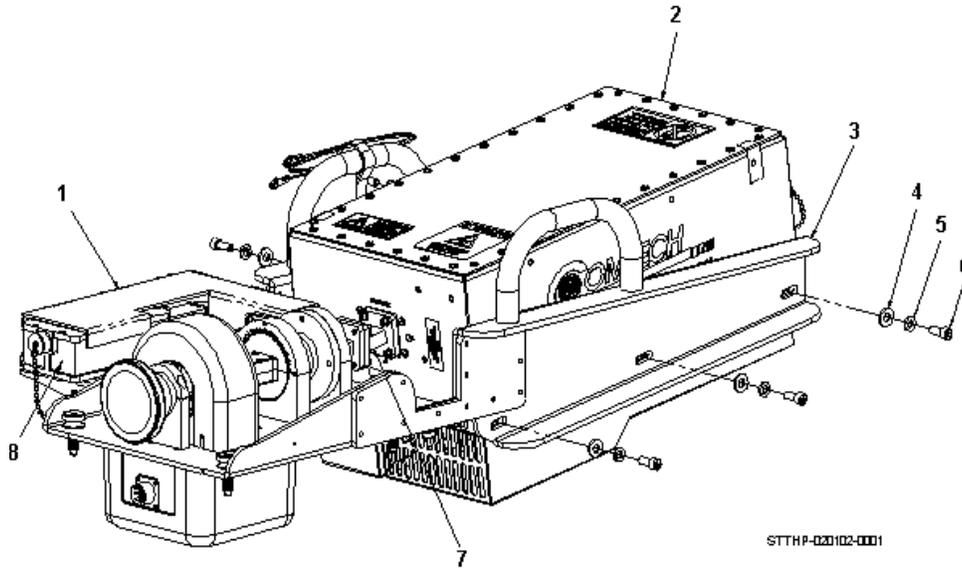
Feed Assembly, KU Band - Group 020102 (Sheet 1 of 6).
